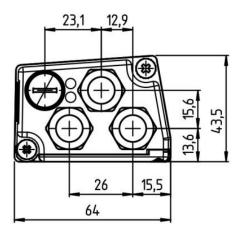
Dimension drawing BE 901 MK SSI connection hood (all dimensions in mm)
